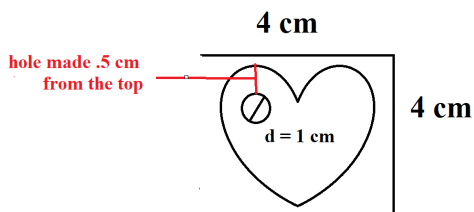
The paper heart dimensions for cardstock cutting. Dimensions are approximate and can be modified based on user preference.
